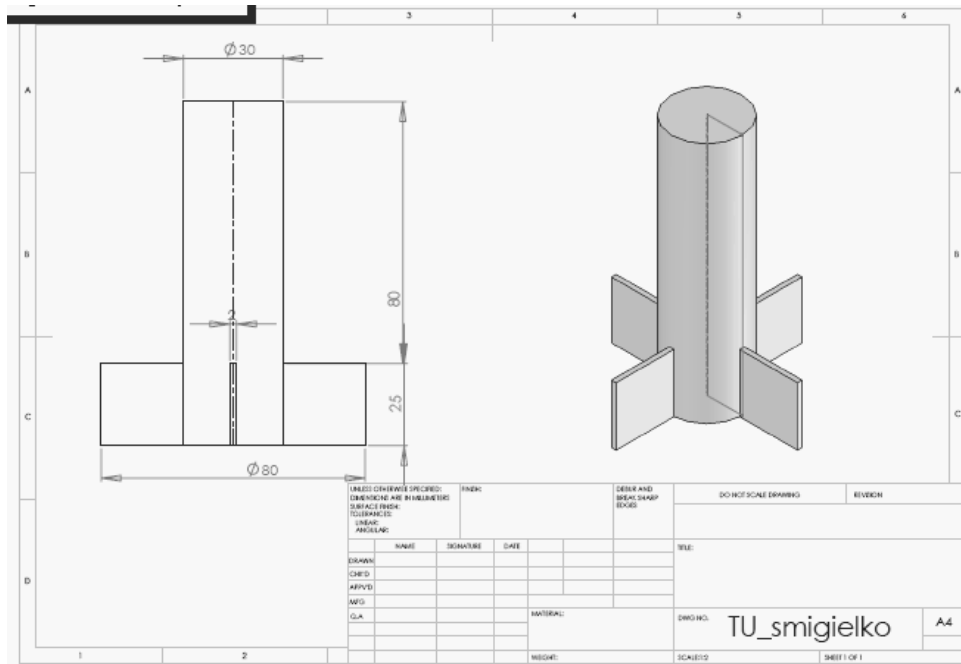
Technical drawing of SiC/C composite stirrer prepared in the program Solid Works
